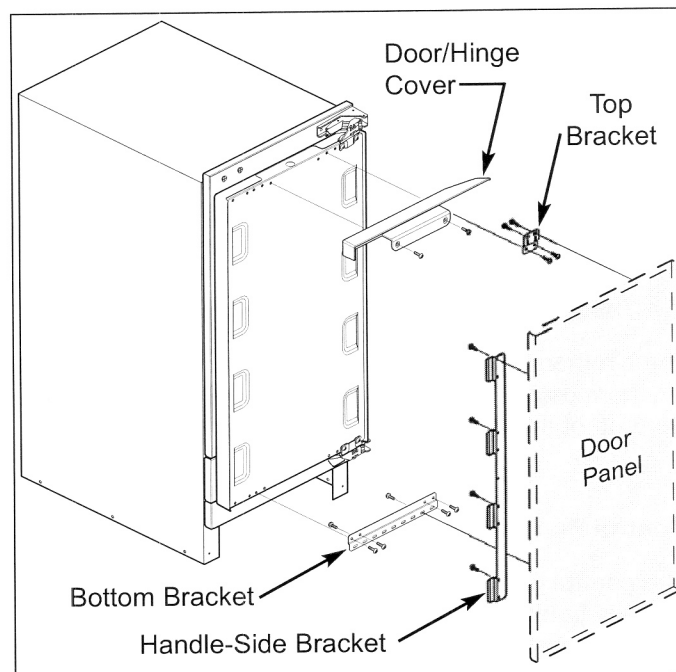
Panel Mount Hardware & Upper Door/Hinge Cover Removal
